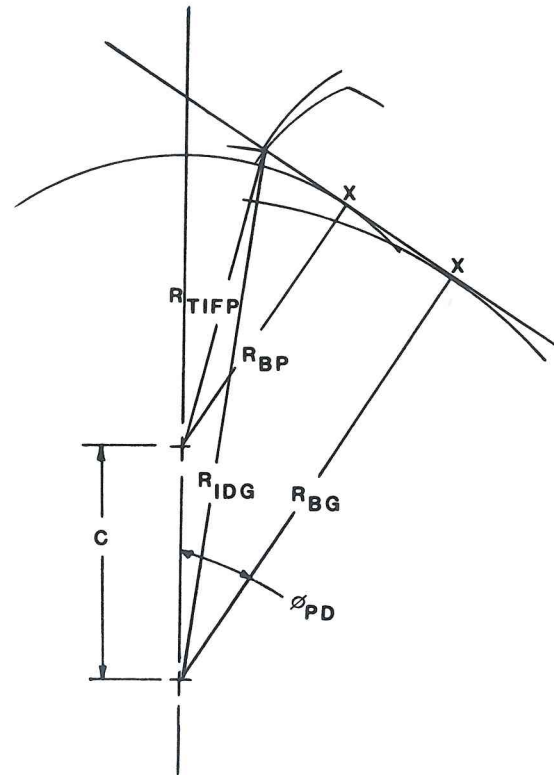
Internal gear mesh degrees of roll to pinion form diameter.
